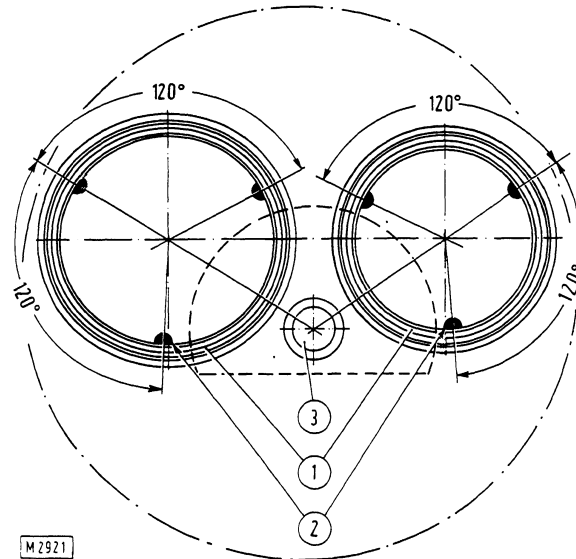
Location of weld beads for valve seat insert removal.
